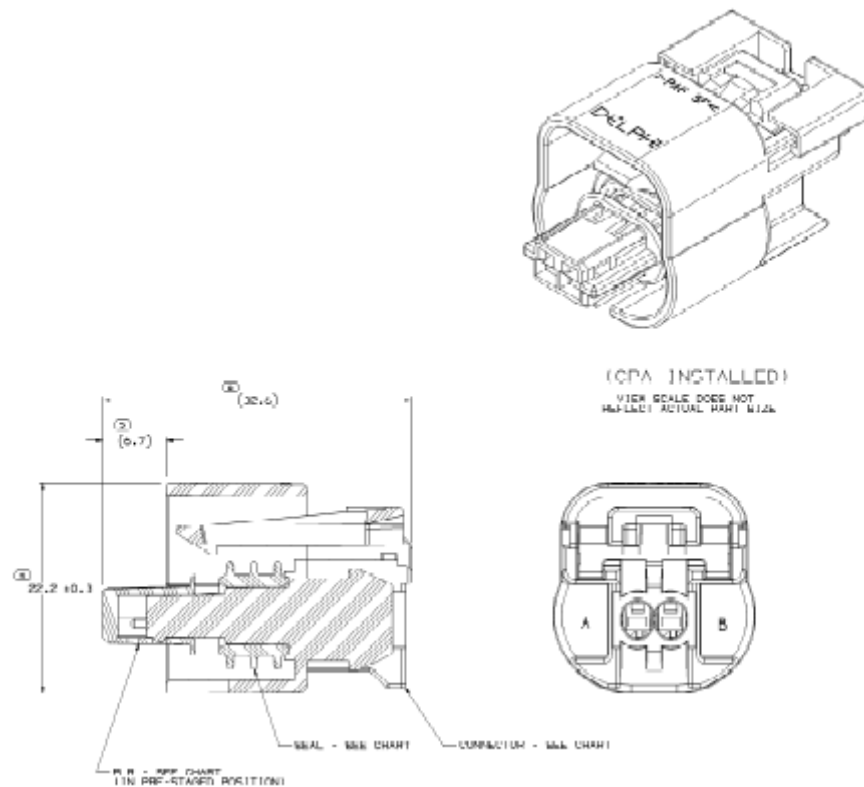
USCAR connector engineering drawings (courtesy of Delphi)
